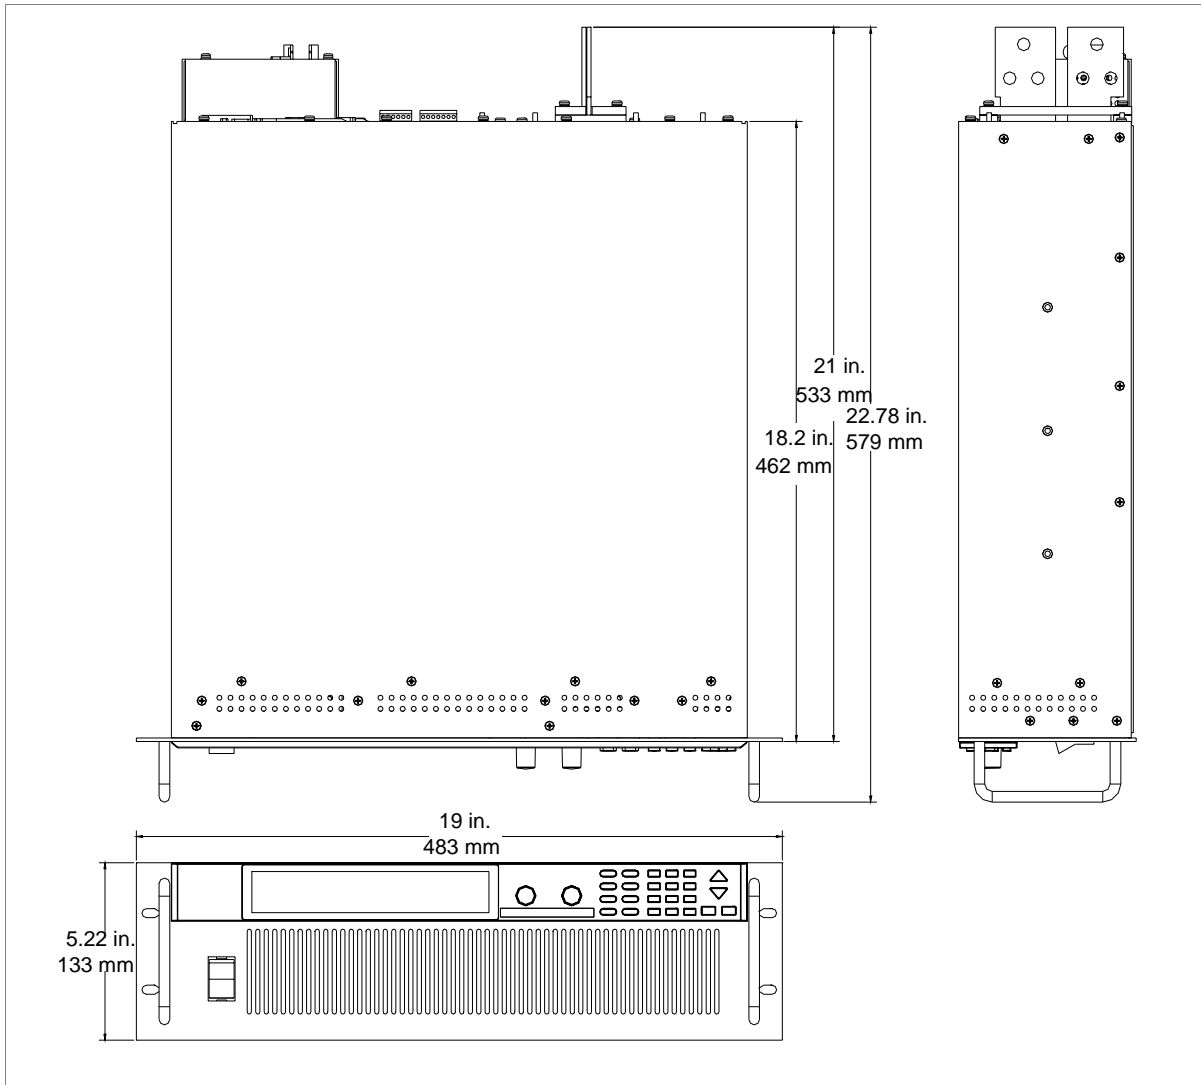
Power Supply Dimensions (6000 Watt unit)
